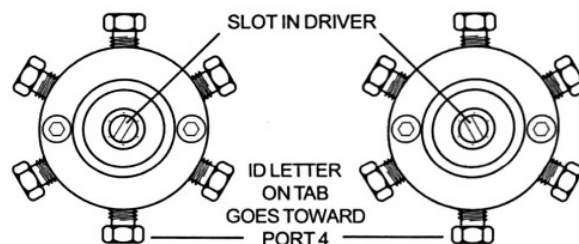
C6W valve with preload and rotor removed, viewed from preload end
